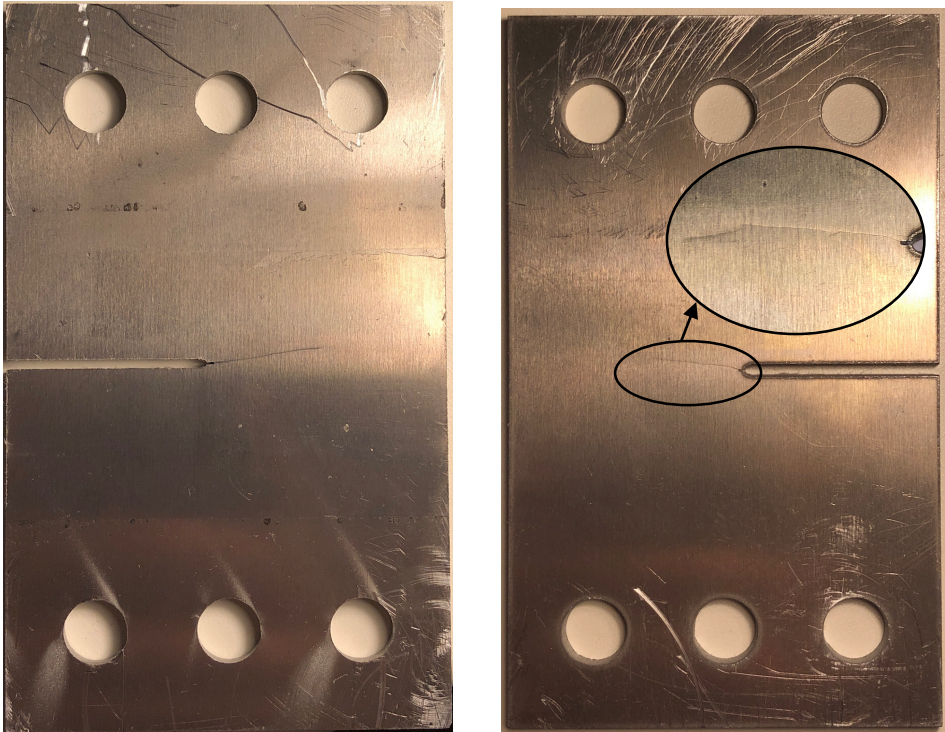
Pictures of specimen number 2 after testing. The front side of the specimen is shown to the left.
